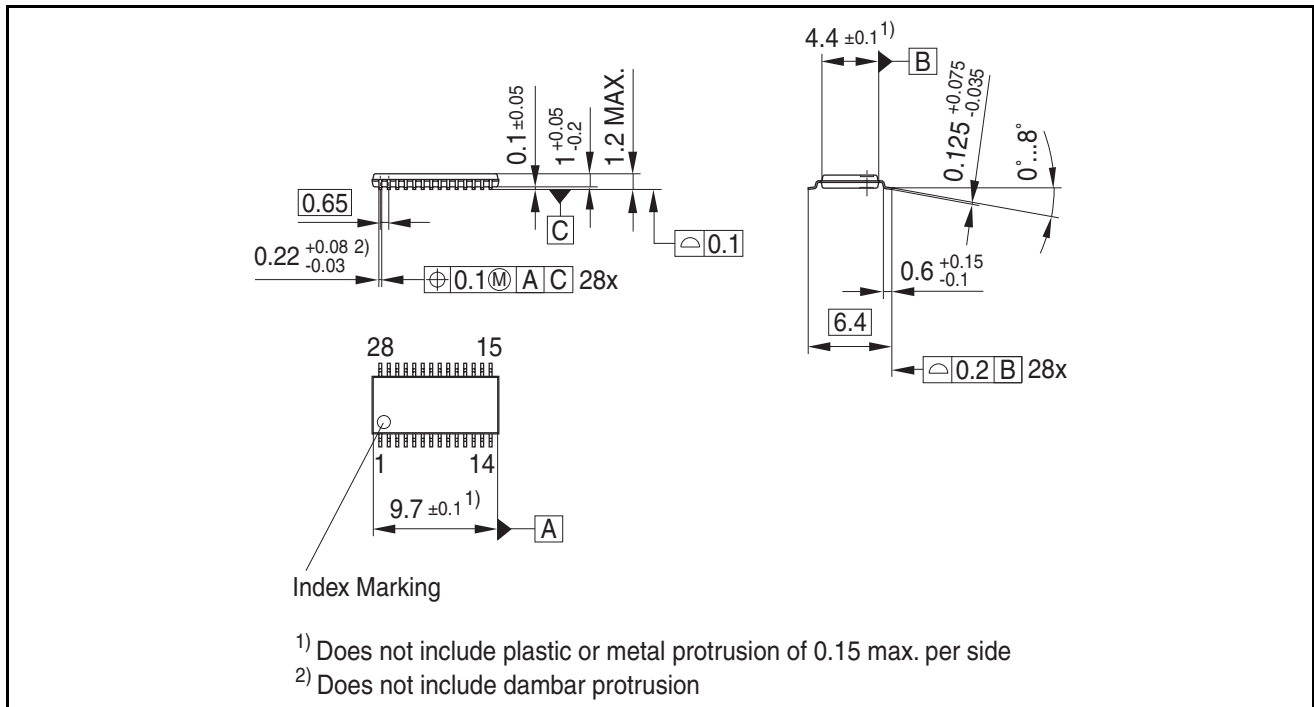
Package Dimensions P-TSSOP-28-1/2
